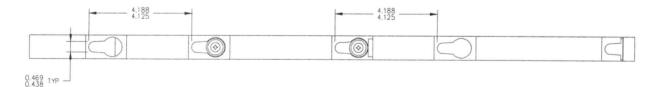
Critical Keyway Dimensions (Forward Beam)
